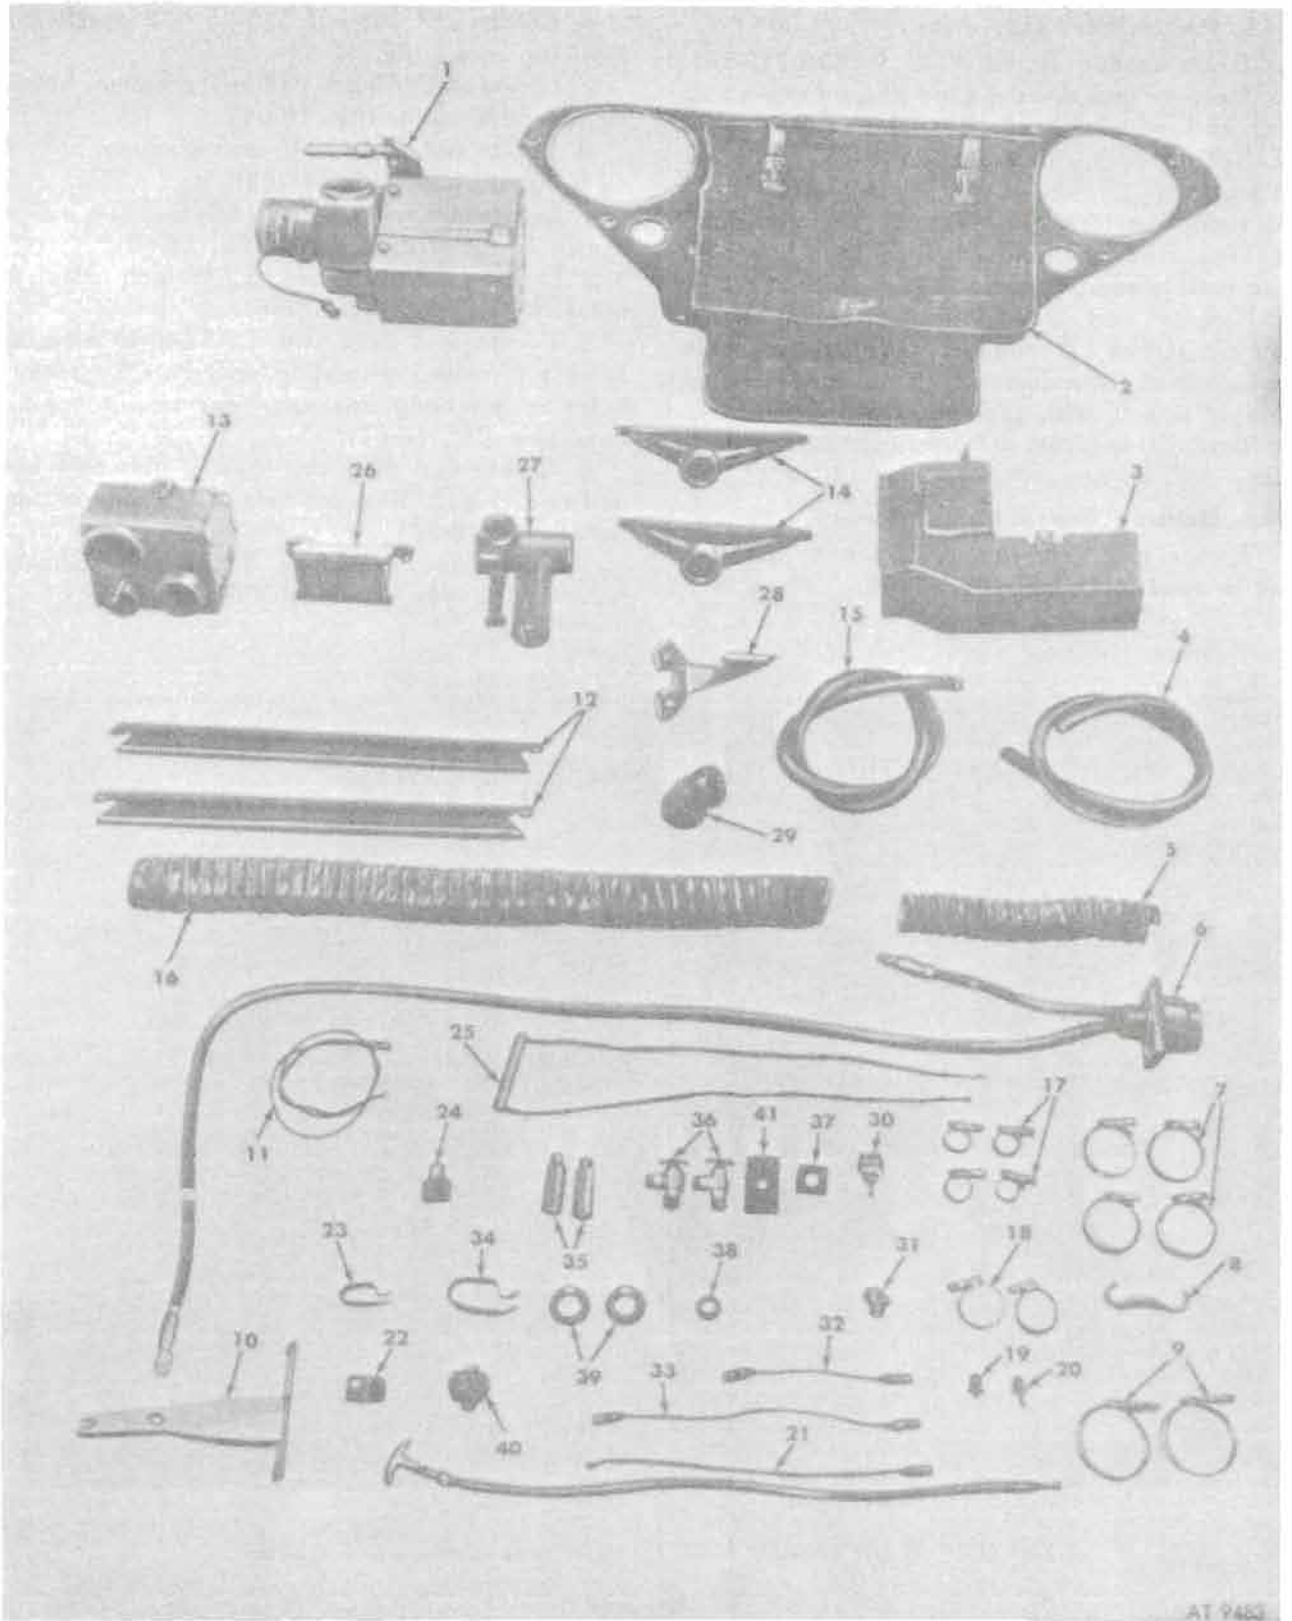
Hot water heater kit (-25°F.) parts and components.
